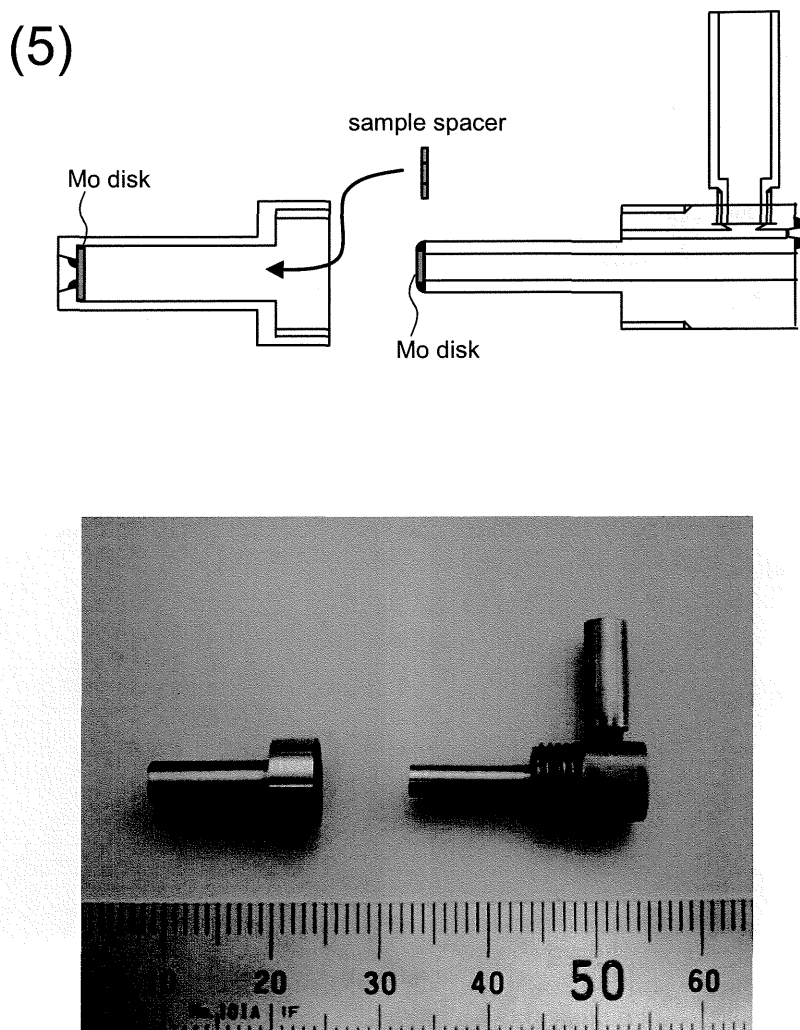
The fifth step of assembling the sample cell. A sample spacer is inserted into the outer pipe and they are screwed with each other. The photograph shows actual components made of molybdenum.
